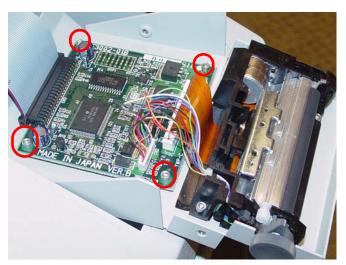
Remove the Screws that Secure the Printer PC Card
